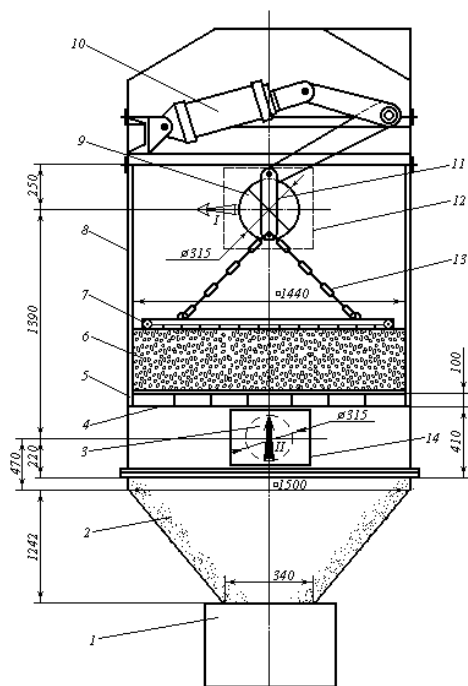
Diagram of chain bag filter FCGM: 1 - transport device; 2 - bunker (mine); 3 - inlet pipe; 4 - support grid; 5 - bounding wall; 6 - filter layer of chains; 7 - movable frame; 8 - case; 9 - outlet pipe; 10 - drive; 11- throttle; 12 - hatch; 13 - load chains; 14 - hatch; I - purified air; II - dusty air. (Source: Goremwikin et al. (2001))
